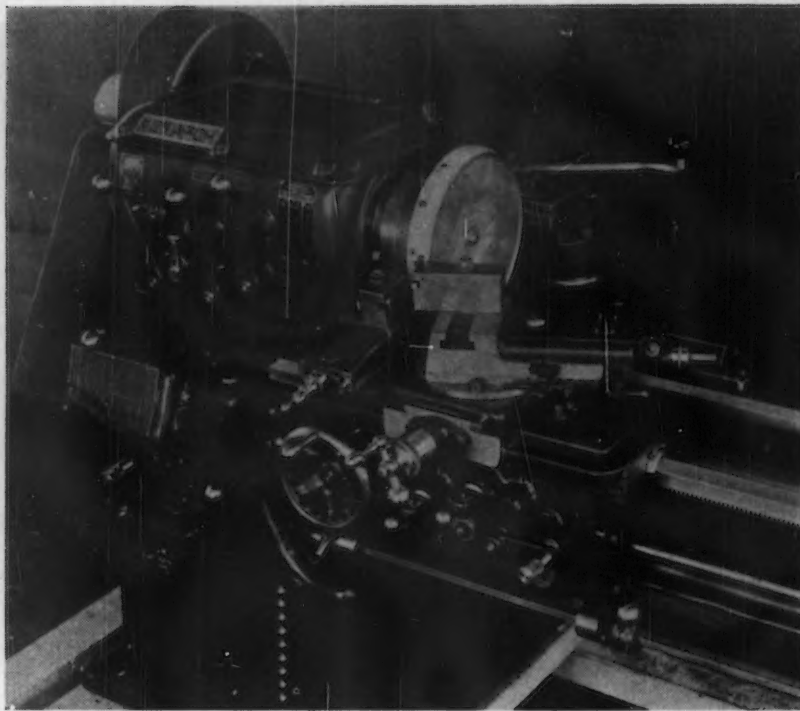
One of a battery of standard specially tooled 14-in. lathes equipped for machining the aluminum lid of steam cookers. Specifications call for steam tight fit without gaskets. It is said that production was stepped up 400 per cent over previous machining methods. Equipment investment is reported as extremely low.
